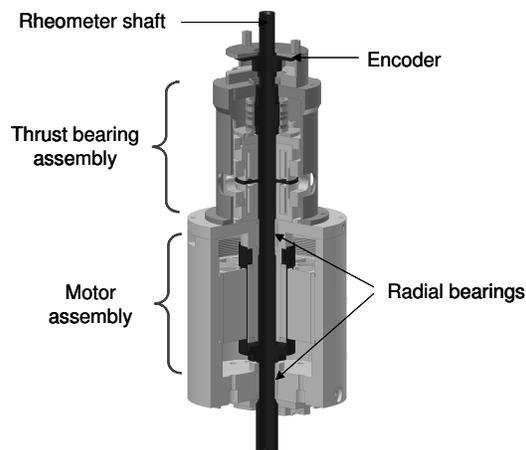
exploded view of the rheometer drive and bearing system. The rotating components are shown as darker.
